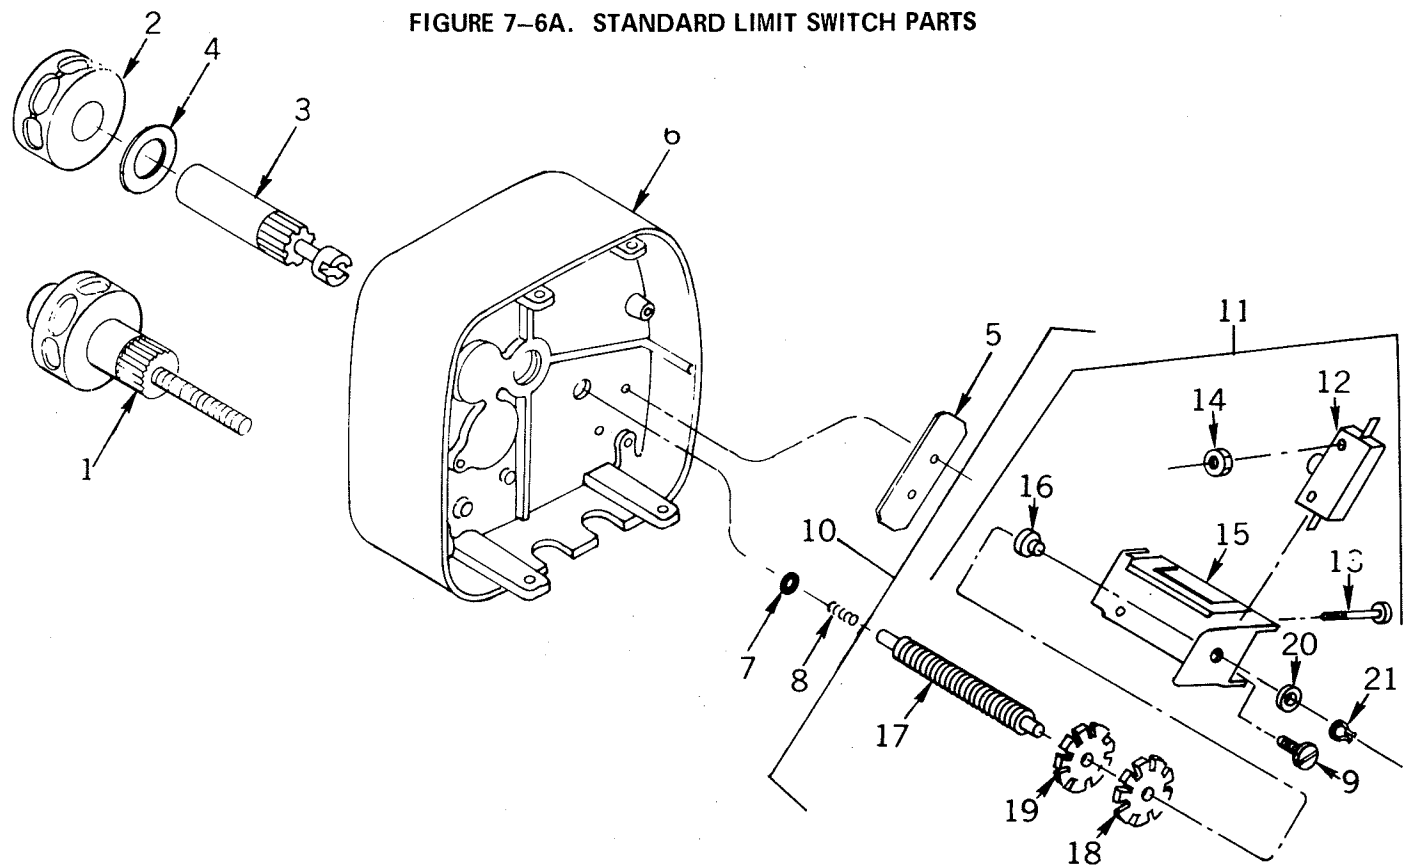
A. STANDARD LIMIT SWITCH PARTS
